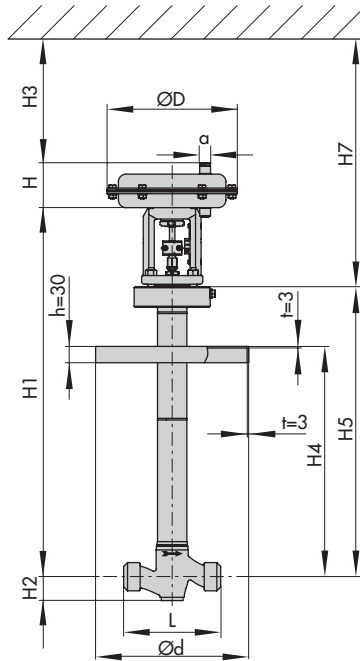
Type 3248-1 Globe Valve with stainless steel valve body
